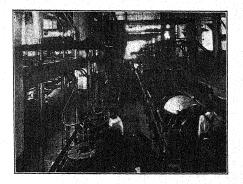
shows a giant calender machine used by one of the manufacturers of automobile tires to make the rubber and cords into one integral piece. The cord fabric, after the gum-dipping, is passed between large steamheated rollers under sufficient sufficient pressure to thoroughly impregnate the cords with the rub-This process is called calendering.
